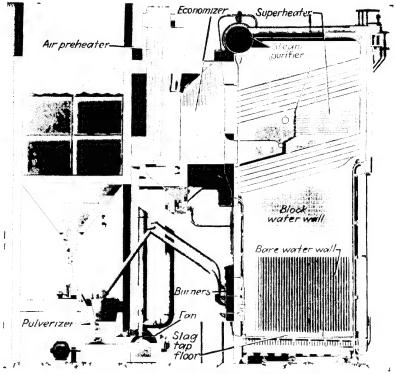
Babcock and Wilcox cross-drum boiler.
